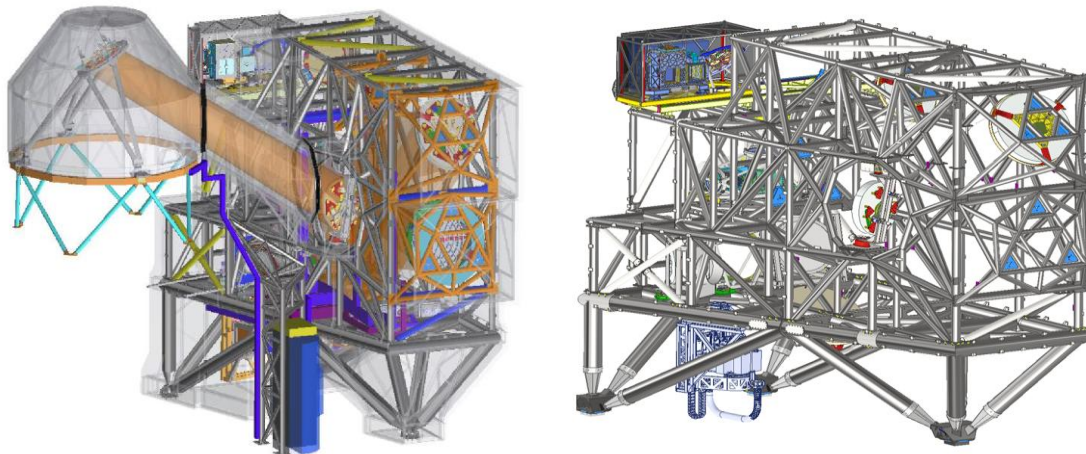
3D CAD model assembly of MORFEO Main Structure (complete and open view)
